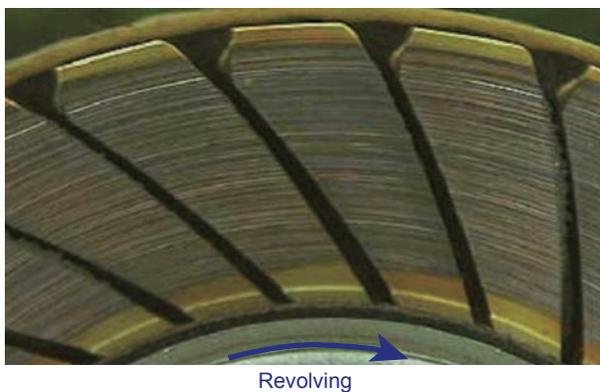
Photo image of the commutator sliding surface after starter motor start-stop endurance test with developed brush
